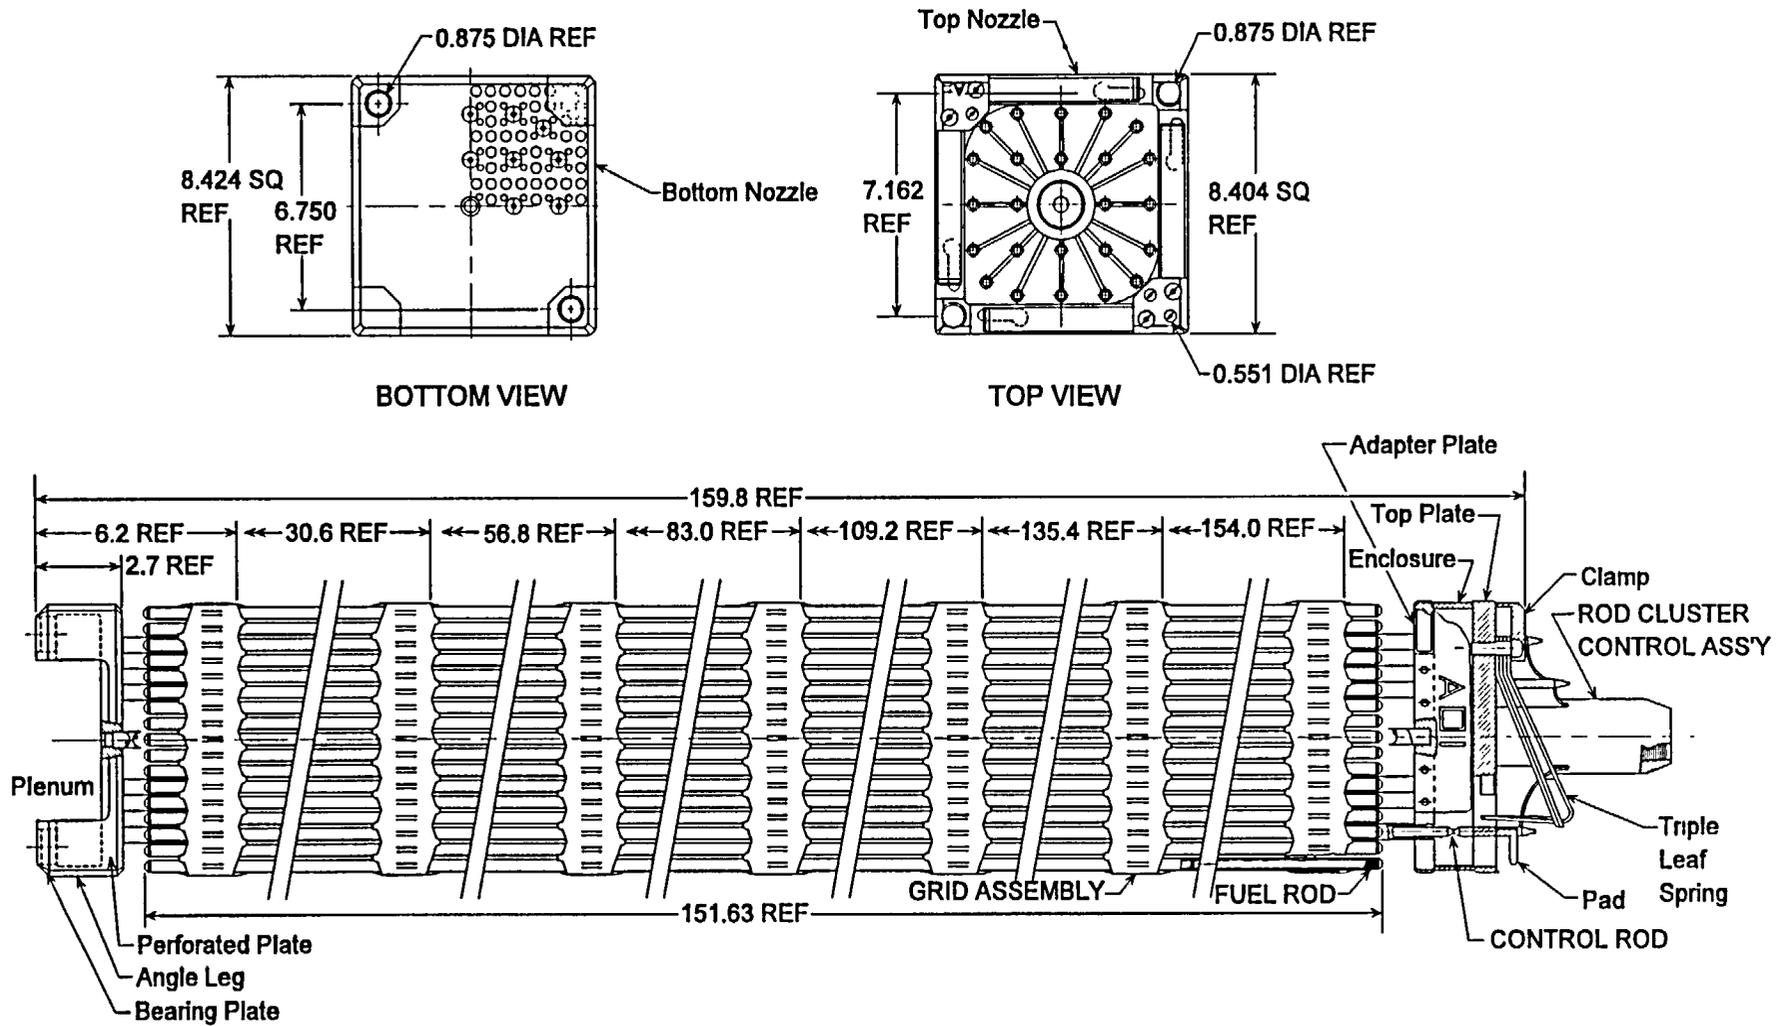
Fuel Assembly and RCCA Cutaway
